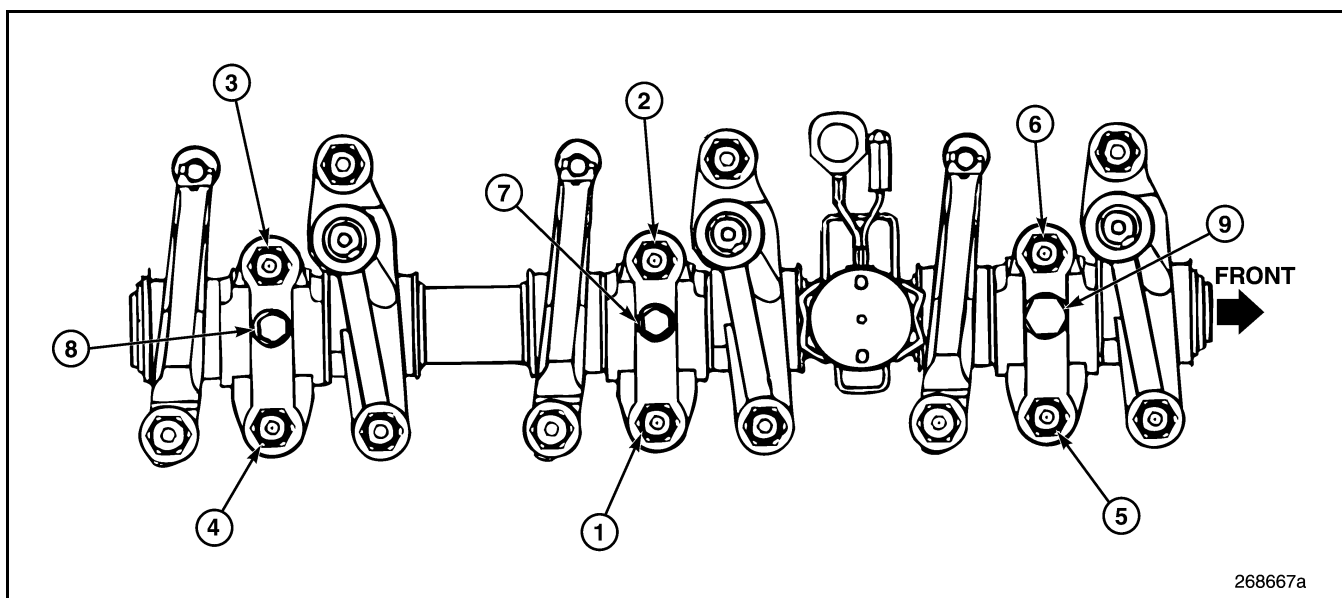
Tightening Sequence — Rocker Shaft Mounting Bracket and Locating Bolts
